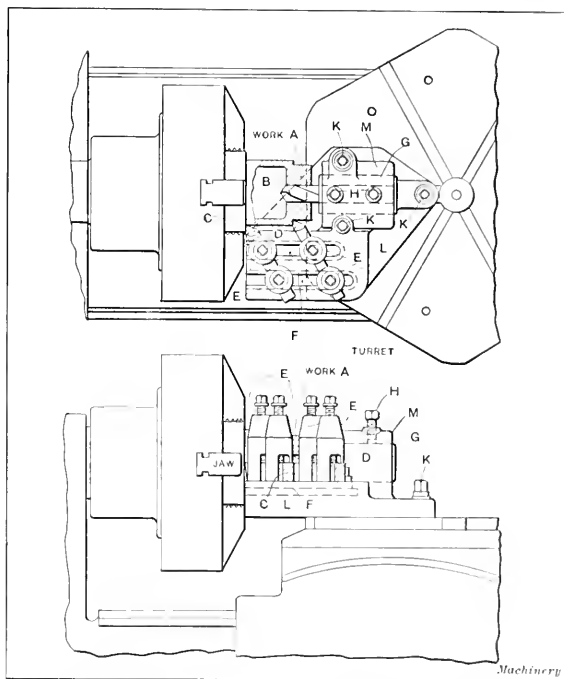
Multiple Tool-holder for the Turntable Type of Lathe
